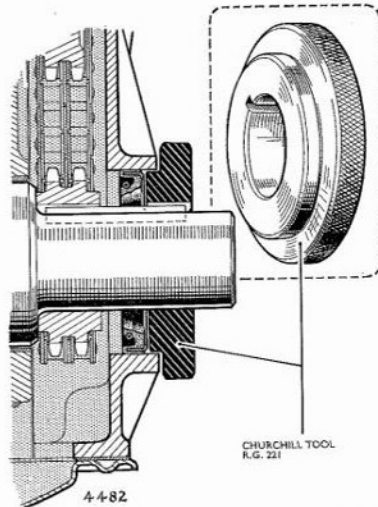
Centralising the timing cover, using Churchill Tool R.G.221
